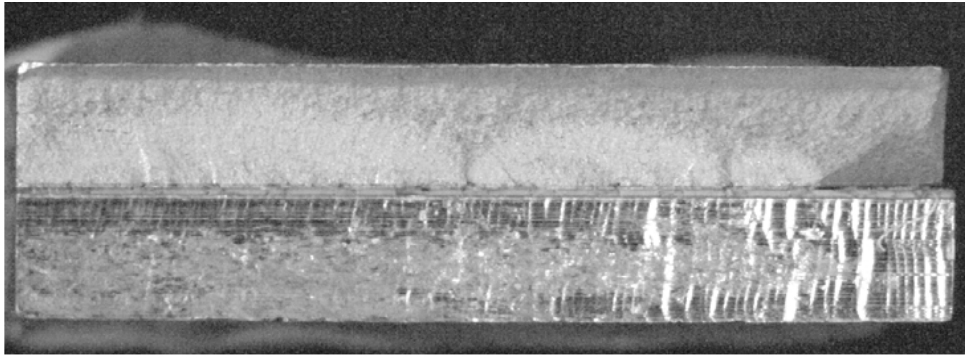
Fracture surface of clad 7075-T6 specimen tested at $R=0.5$ with a maximum shear stress of 20 MPa showing multiple fatigue cracks initiated in cladding layer (specimen shown approximately full size).
